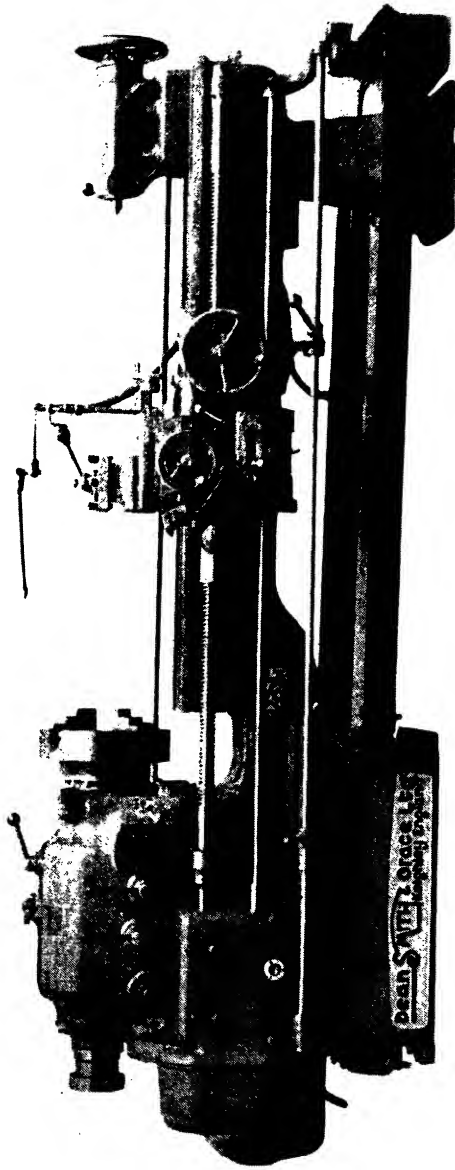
SCREW CUTTING, SELF-ACTING, HIGH-SPEED PRODUCTION LATHE
